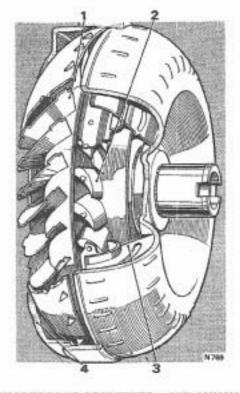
TORQUE CONVERTER—CUT-AWAY VIEW
